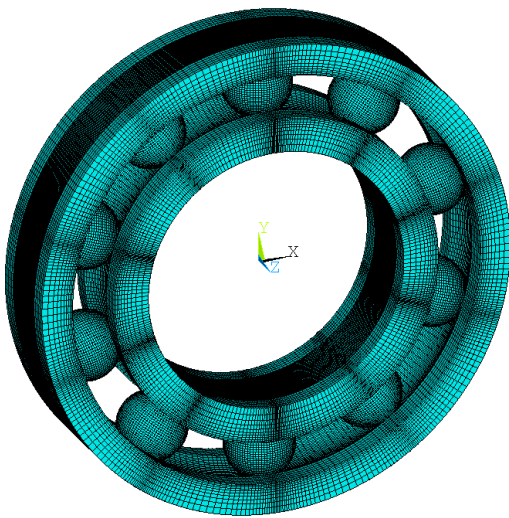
Full Finite Element model of a deep groove ball bearing (without housing)
